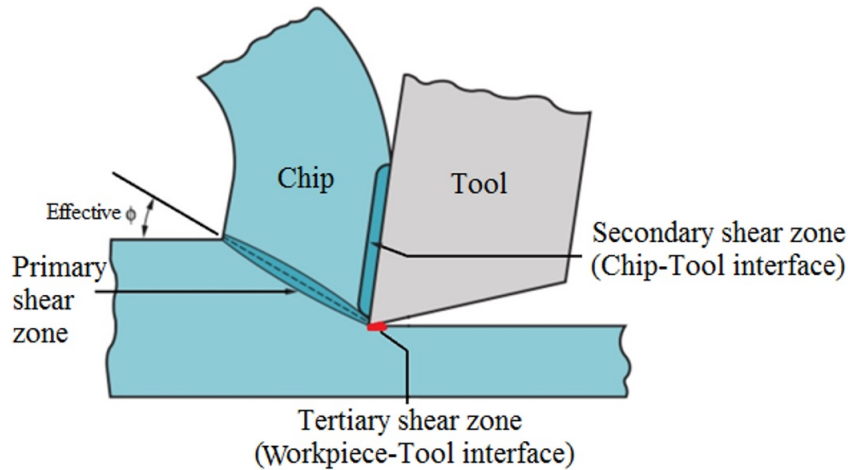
Metal cutting mechanism showing the three developed shear zones [32]
